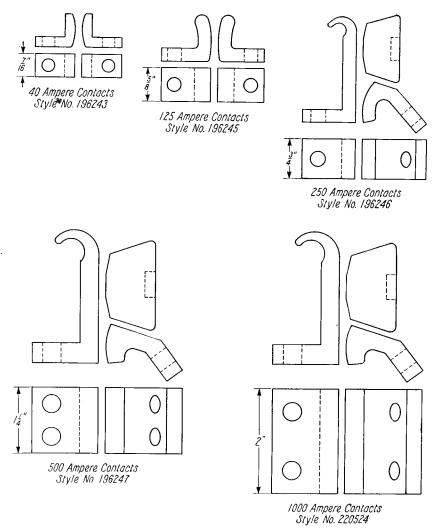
Type F Contacts—Style Numbers Include Complete Set of Contacts with Screws and Lock Washers
